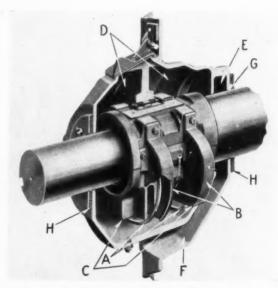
Leak-proof bearing for large motors. Oil rings are enclosed in chambers
